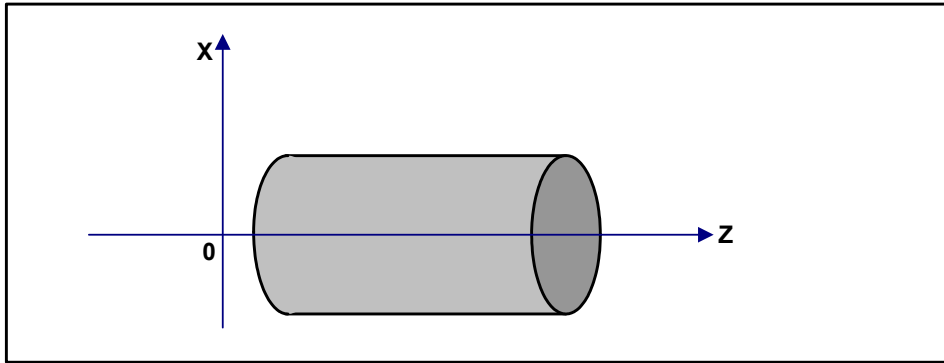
Workpiece coordinate system of constant surface cutting speed control
